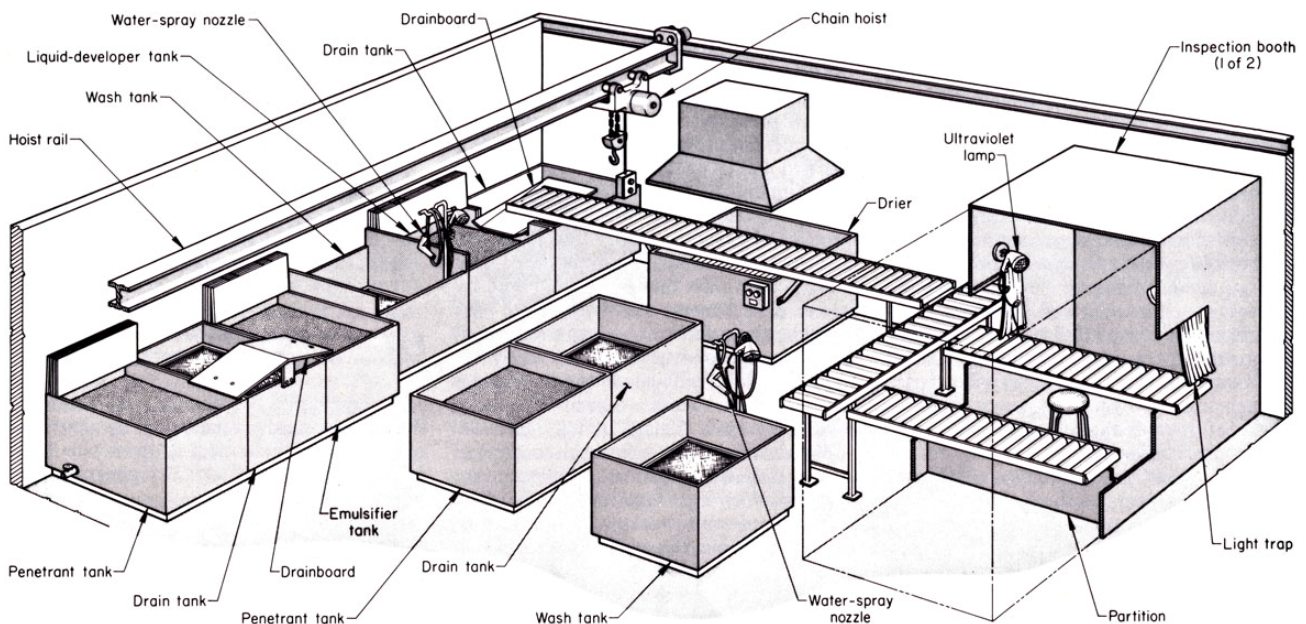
Arrangement of equipment used in casting part control by means of liquid penetrant inspection in a foundry plant.
